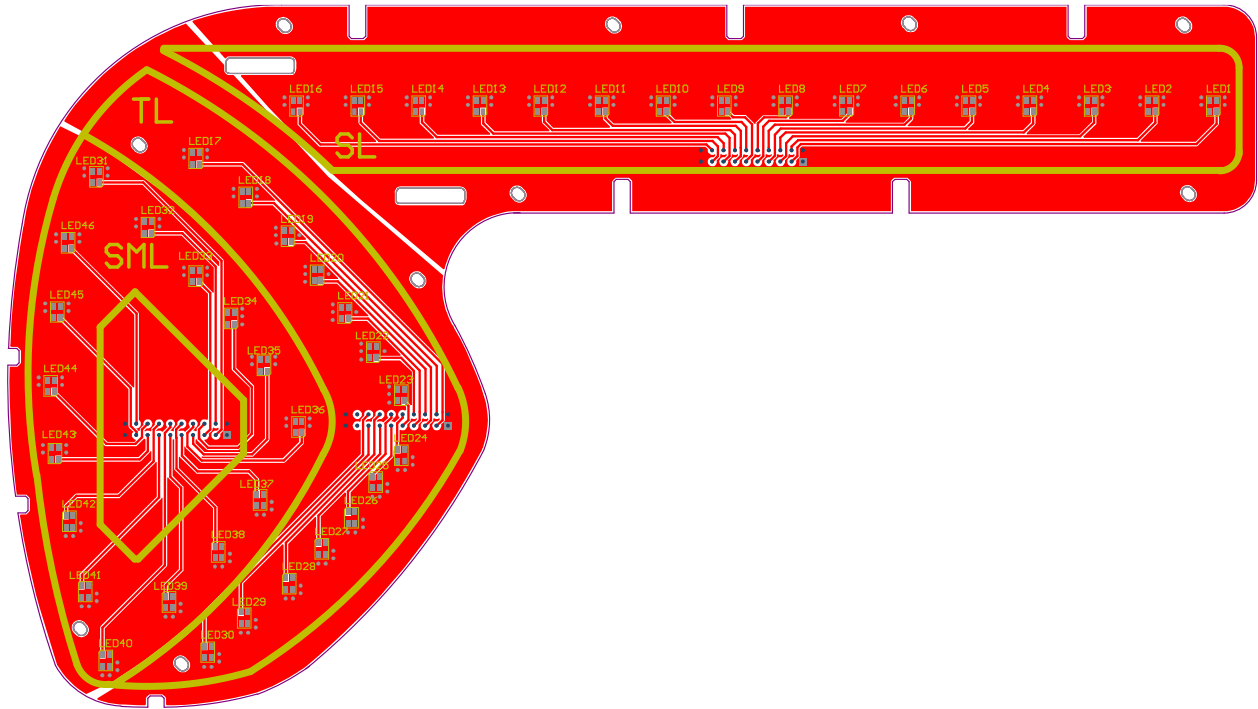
Top Silk and Top Layer of EVQ7221-TL-00A Tail Lamp Board
